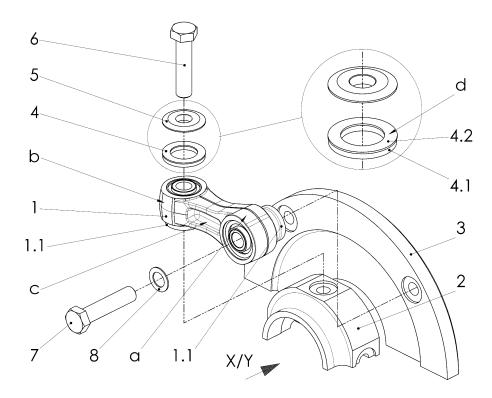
Mounting the links ("cw" clockwise rotation)
